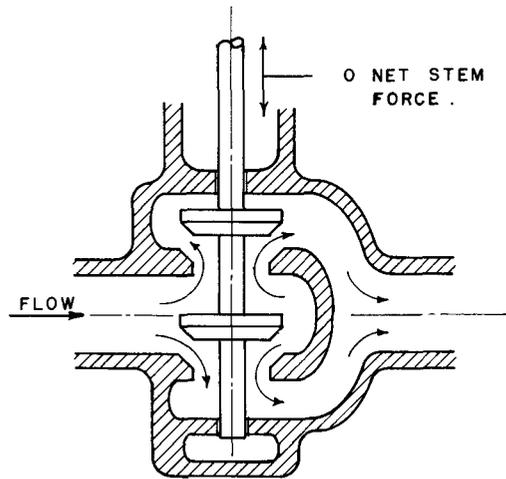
Balanced Pressure Disc Throttle Valve.
